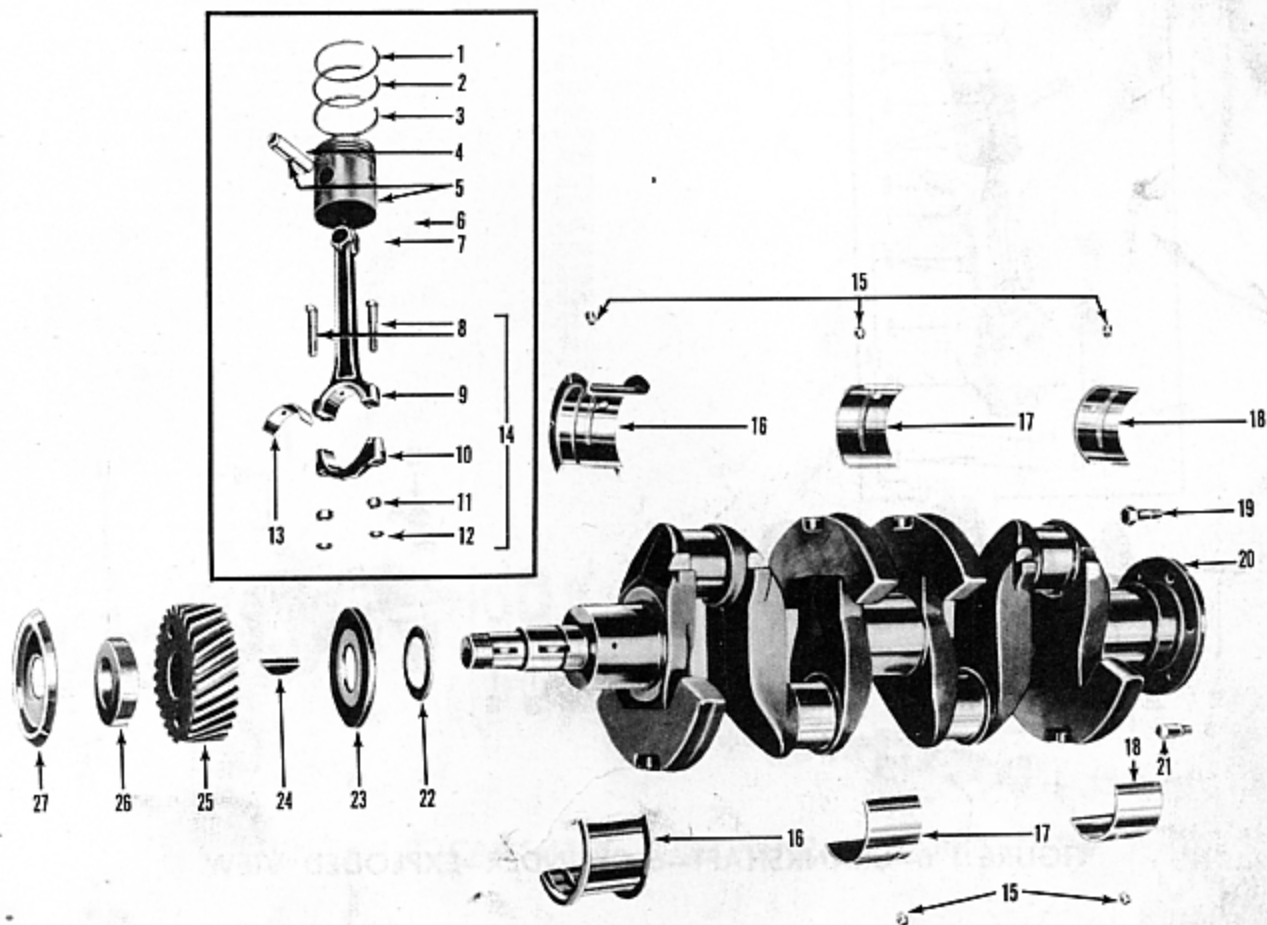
CRANKSHAFT—4 CYLINDER—EXPLODED VIEW
